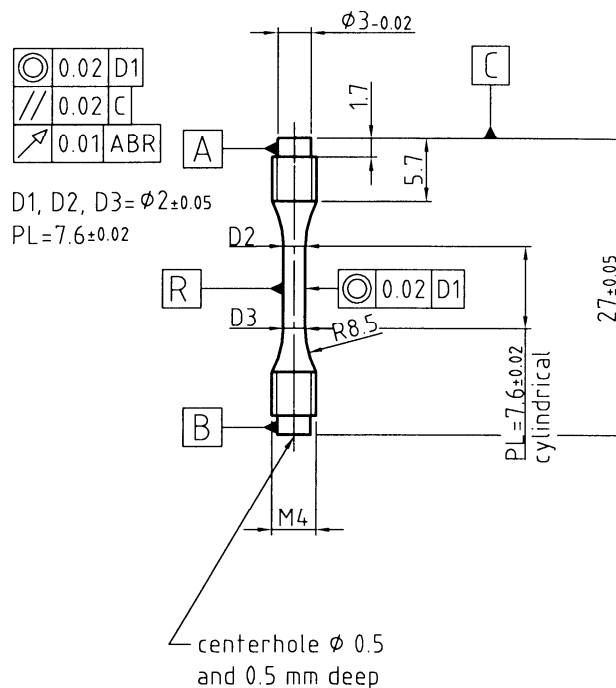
Tensile/Low Cycle Fatigue specimen
